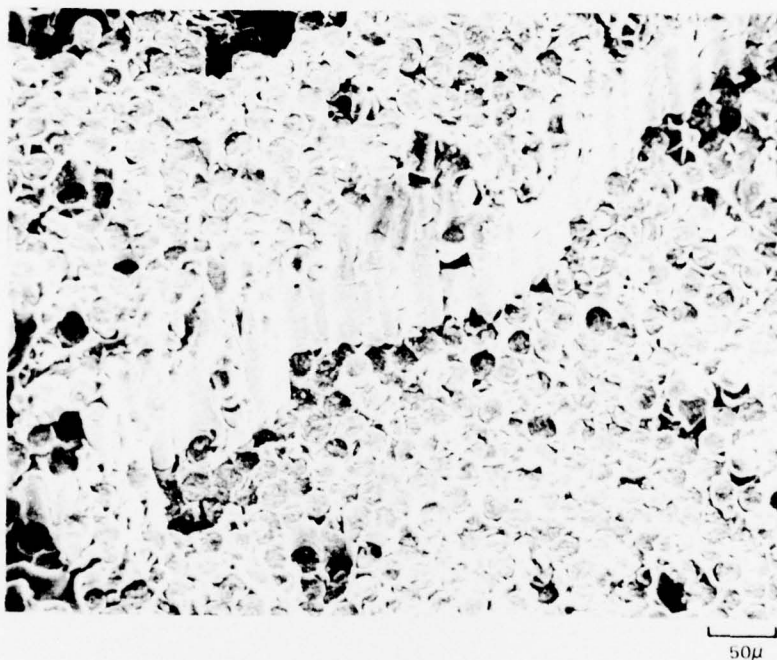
FRACTURE SURFACE OF SPECIMEN 19-26
